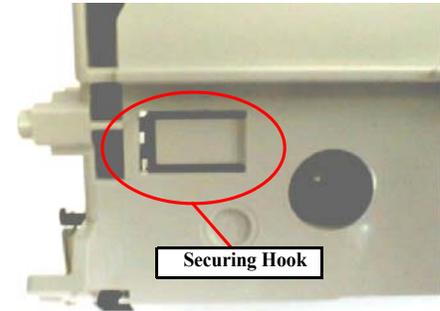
Right Feed Roller Assembly Securing Hook Position
